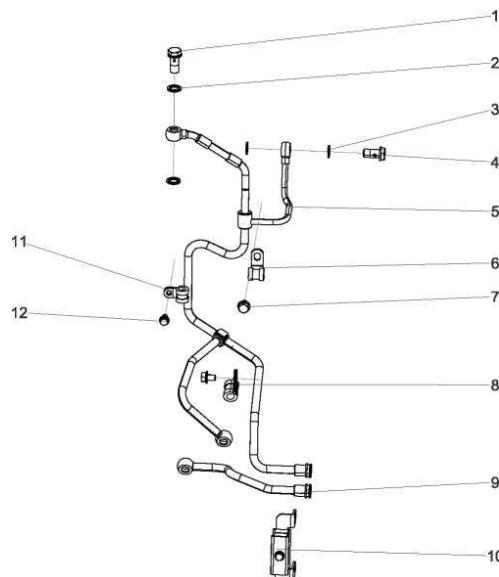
Drawing of analysis of low pressure oil pipe assembly
